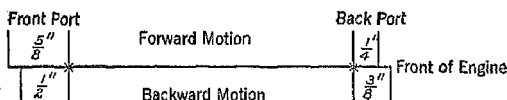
Combined Valve-Rod and Eccentric-Rod Error
